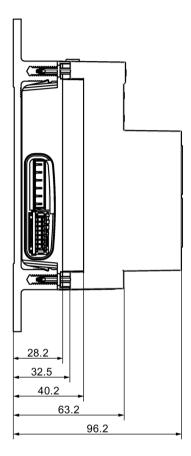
Dimension drawing of electronic module with CM IO 1xM23 connection module
